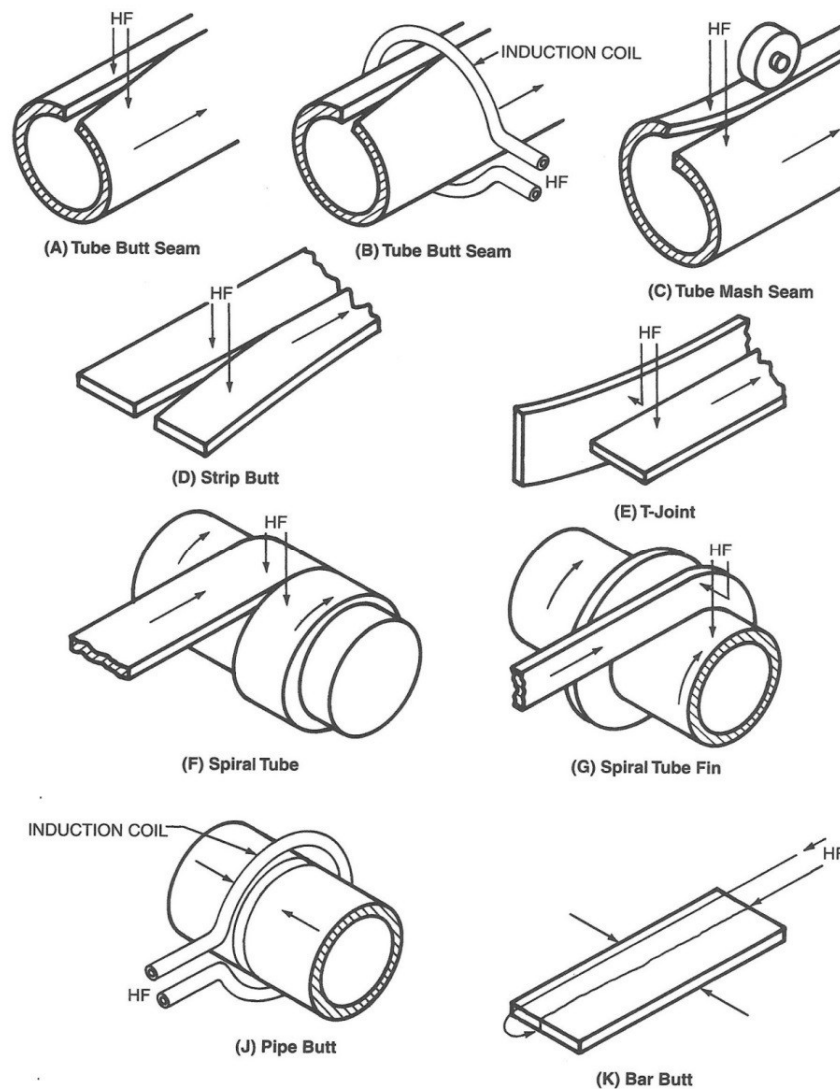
L-6: Basic joint designs for HF welds in pipe, tube, sheet, and bar stock.
